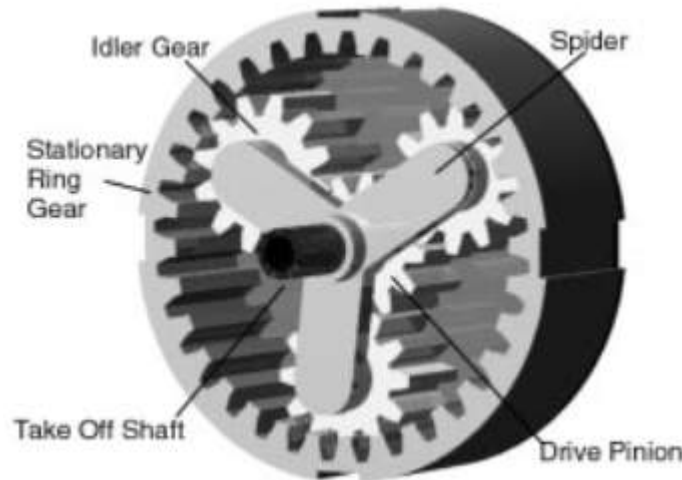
Planetary gear. Figure courtesy of *Martin Sprocket* [39].
